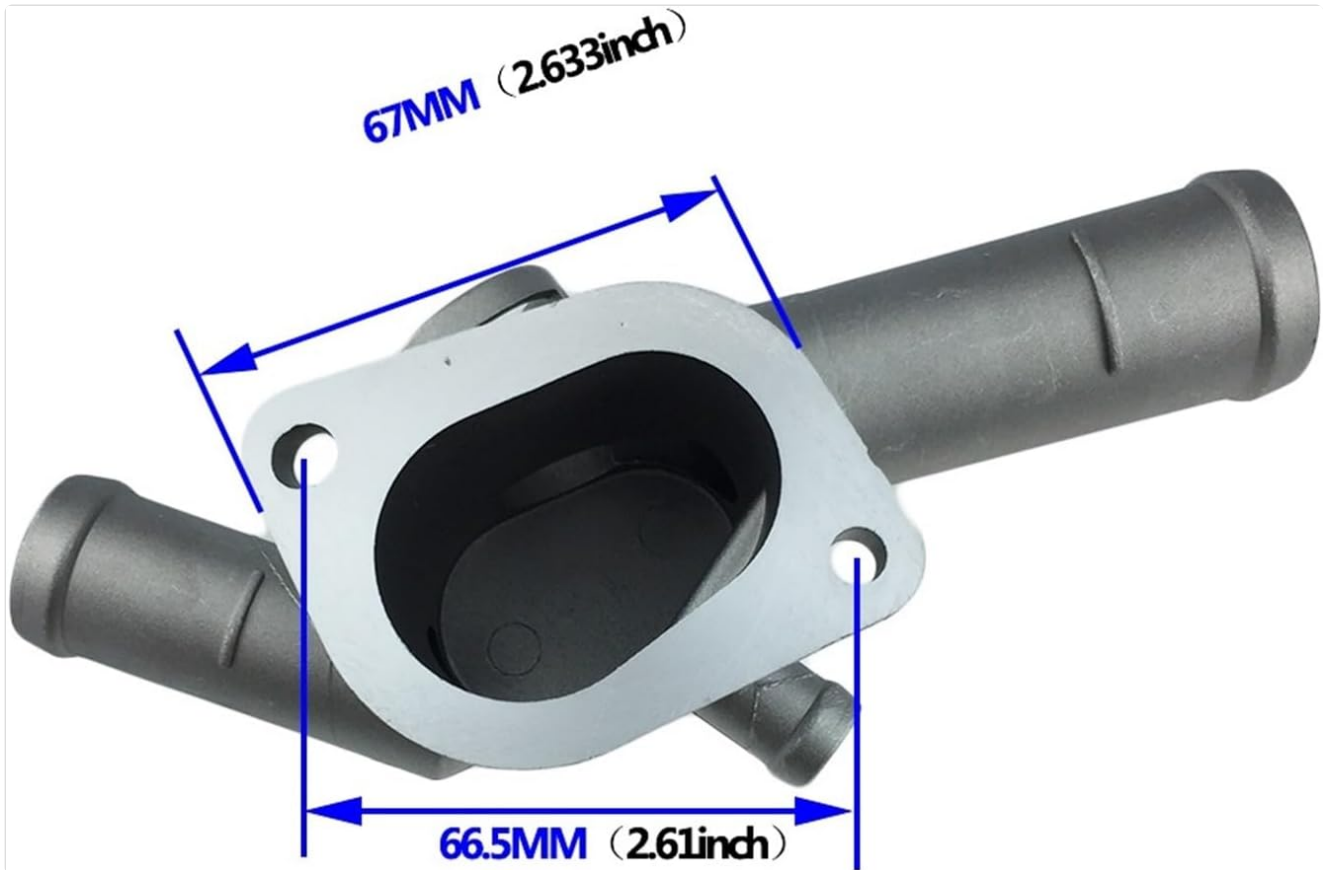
Bottom view of the thermostat housing coolant pipe, highlighting the mounting flange and bolt holes. This perspective is important for understanding how the unit attaches to the engine block.
